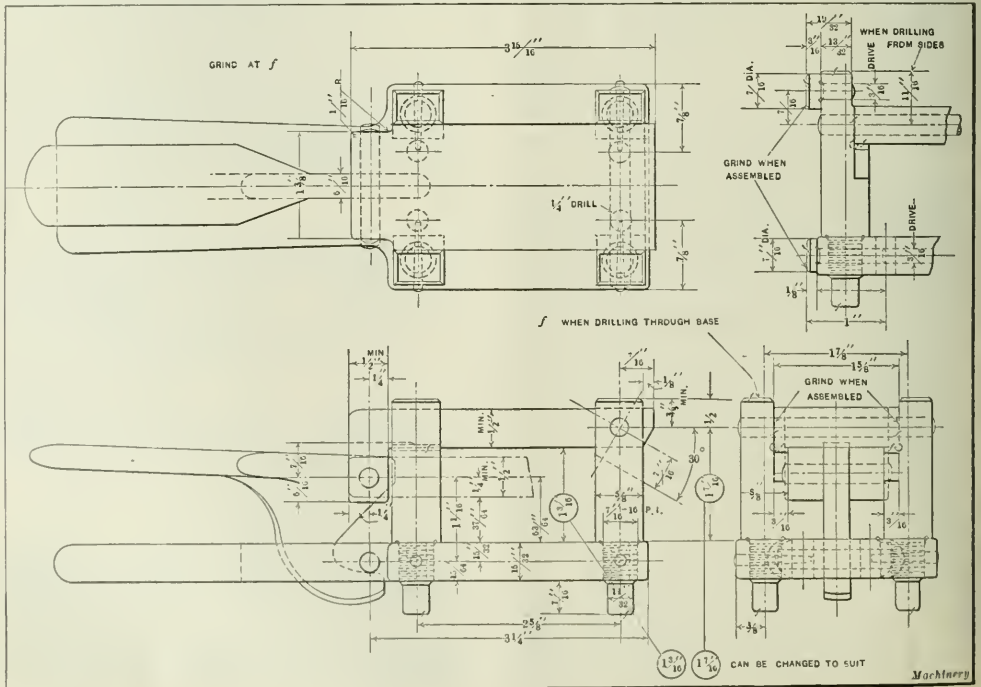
Drill Jig equipped with a Cam-handle and a Standard Base
